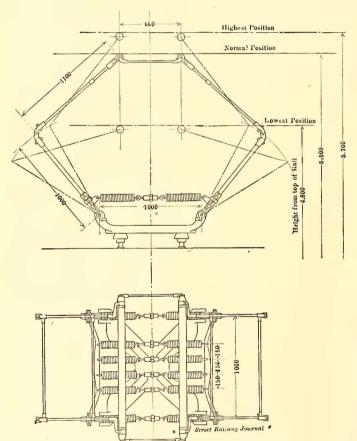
ELEVATION AND PLAN OF FINZI COLLECTOR FIRST USED
